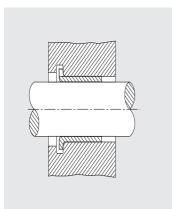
Cylindrical shaft. The collar of the Plastic Plain Bearing snap-fits into a groove milled into the housing. The groove must be wider than dimension s, as per Table 4.
